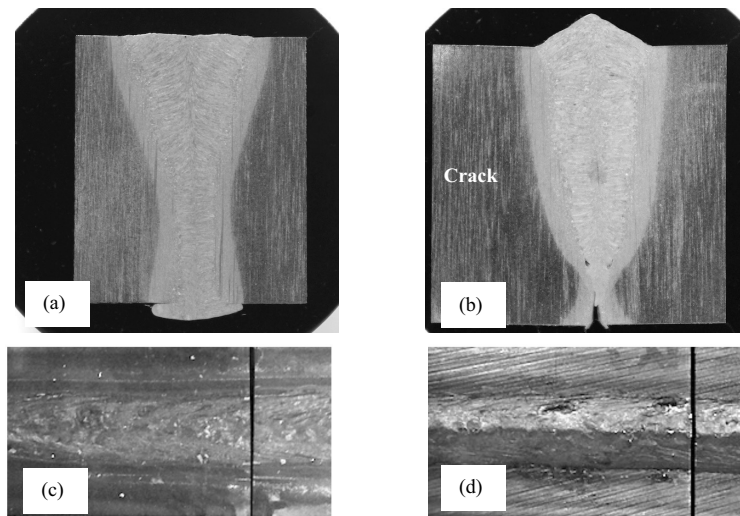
Macro-section of single-pass welds: (a) full penetration experiment, and (b) partial penetration experiment with a crack in the center. Top view of the weld beads: (c) full penetration experiment, and (d) partial penetration experiment.
